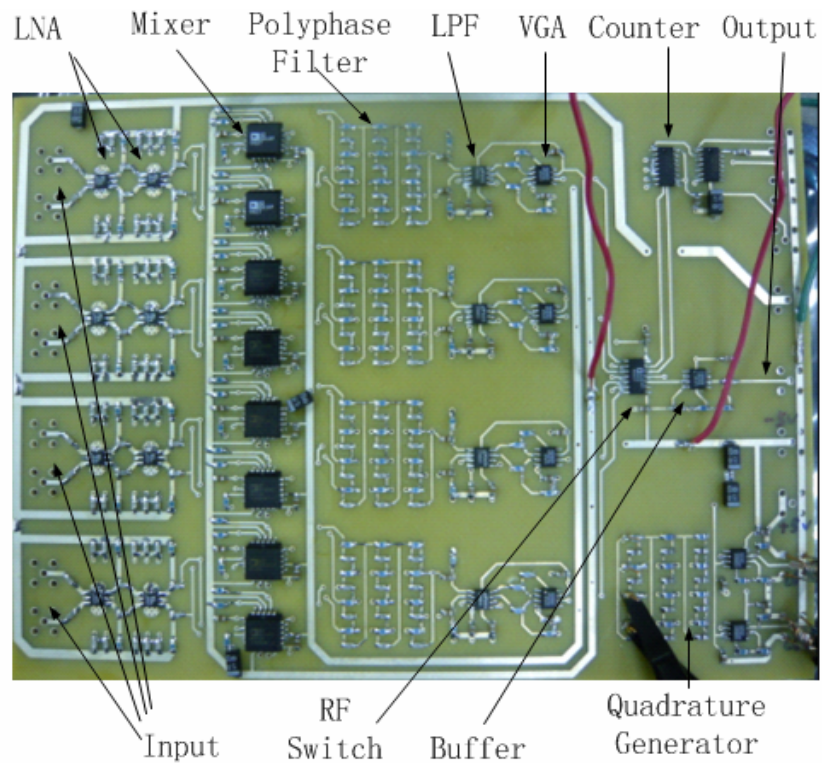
Photograph of the Four-Channel Front-End with TDM on a Single PCB
